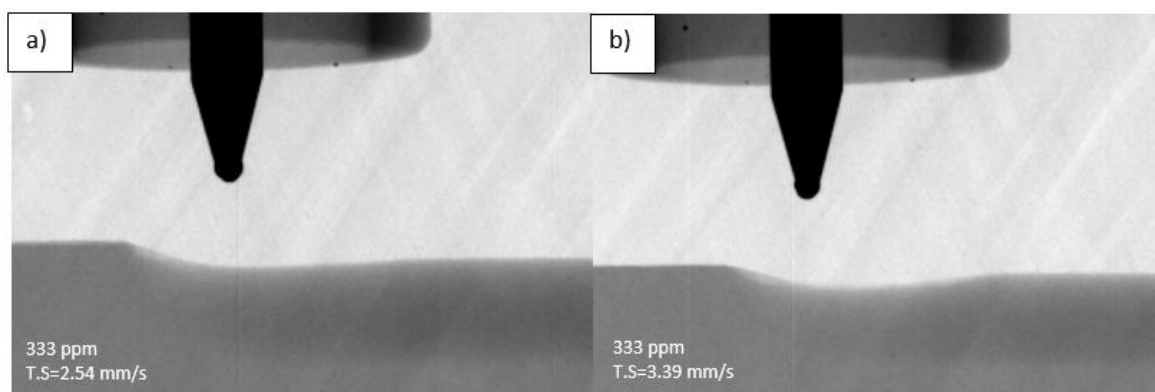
Alloy 4047 welded using 333 ppm of shielding gas hydrogen at a) 2.54 mm/s and b) 3.39 mm/s.
